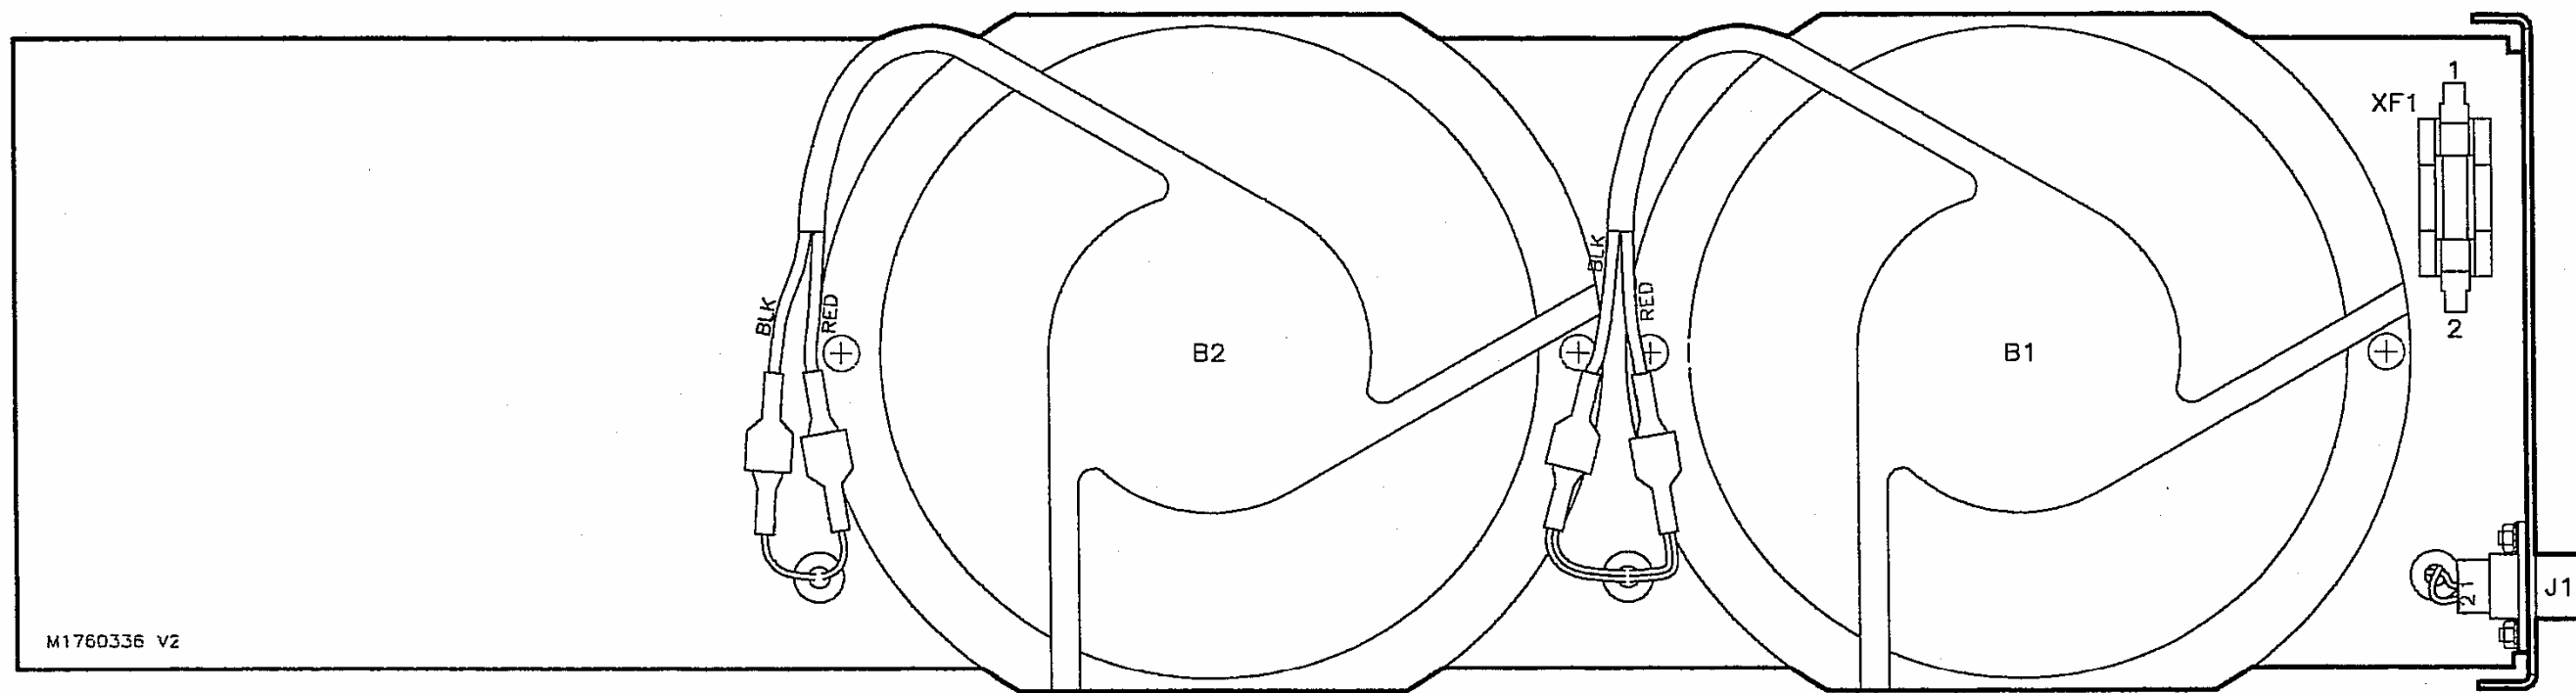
Assembly Detail - NAX168 Fan Tray
